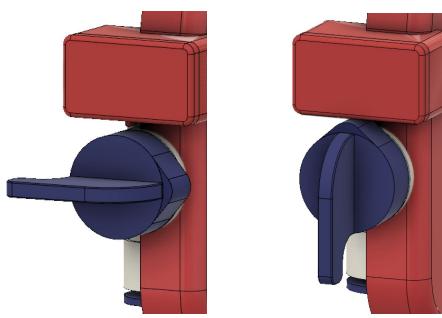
At left: Valve closed, switch open. At right: Valve open, switch depressed
